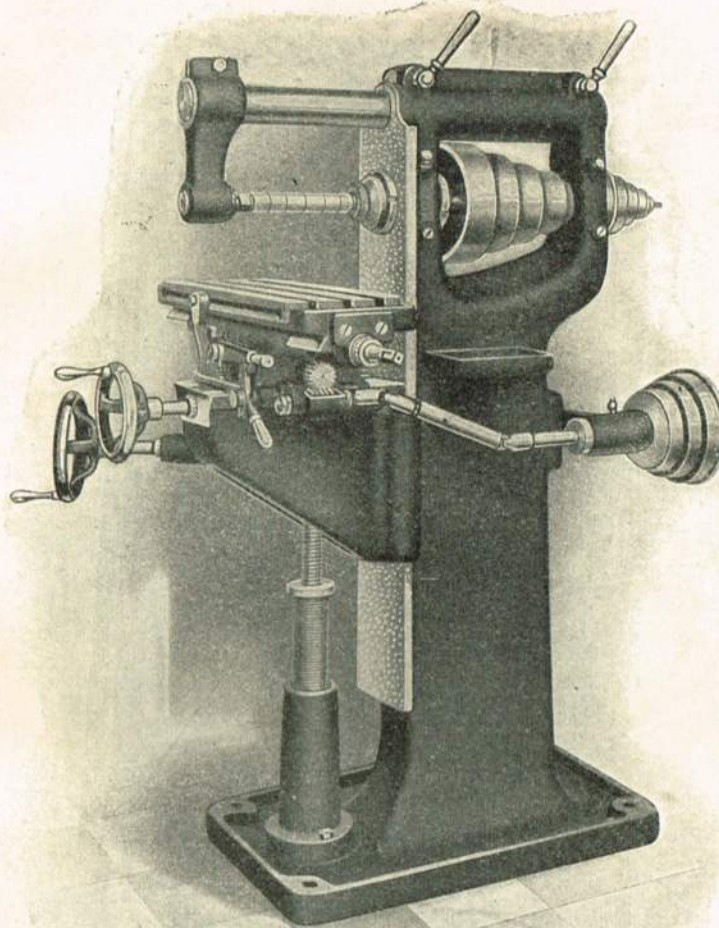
The "Perth" Precision Horizontal Milling Machine.
